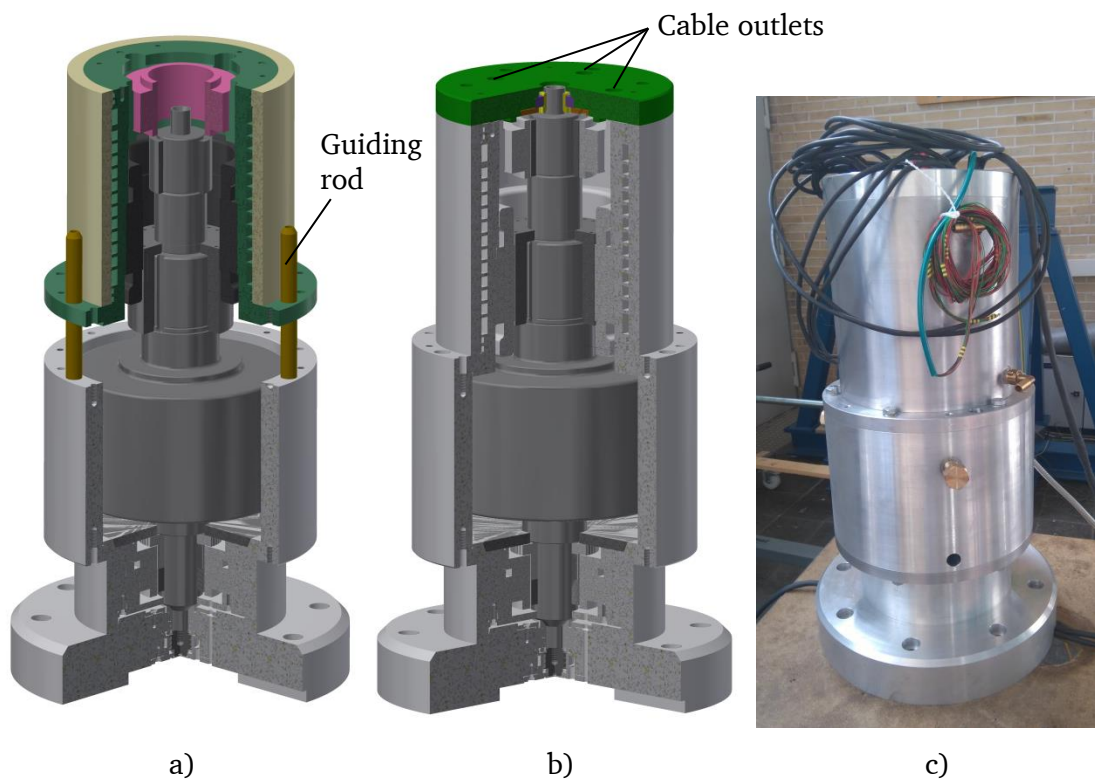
System assembly course: a) step 3: assemble the upper housing [47], b) step 4: assemble the top lid [47], c) assembled prototype
